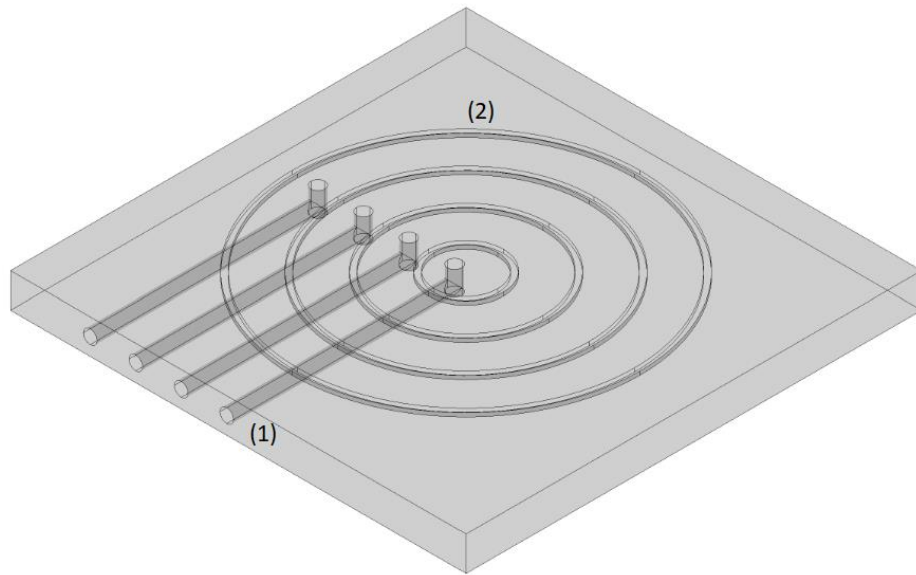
Bottom plate of the valves vacuum system. This aluminium plate has four tubes (1) which connect the vacuum pump to the top plate. It also has four grooves (2) to place O-rings. These prevent any leaks during the measurements.
